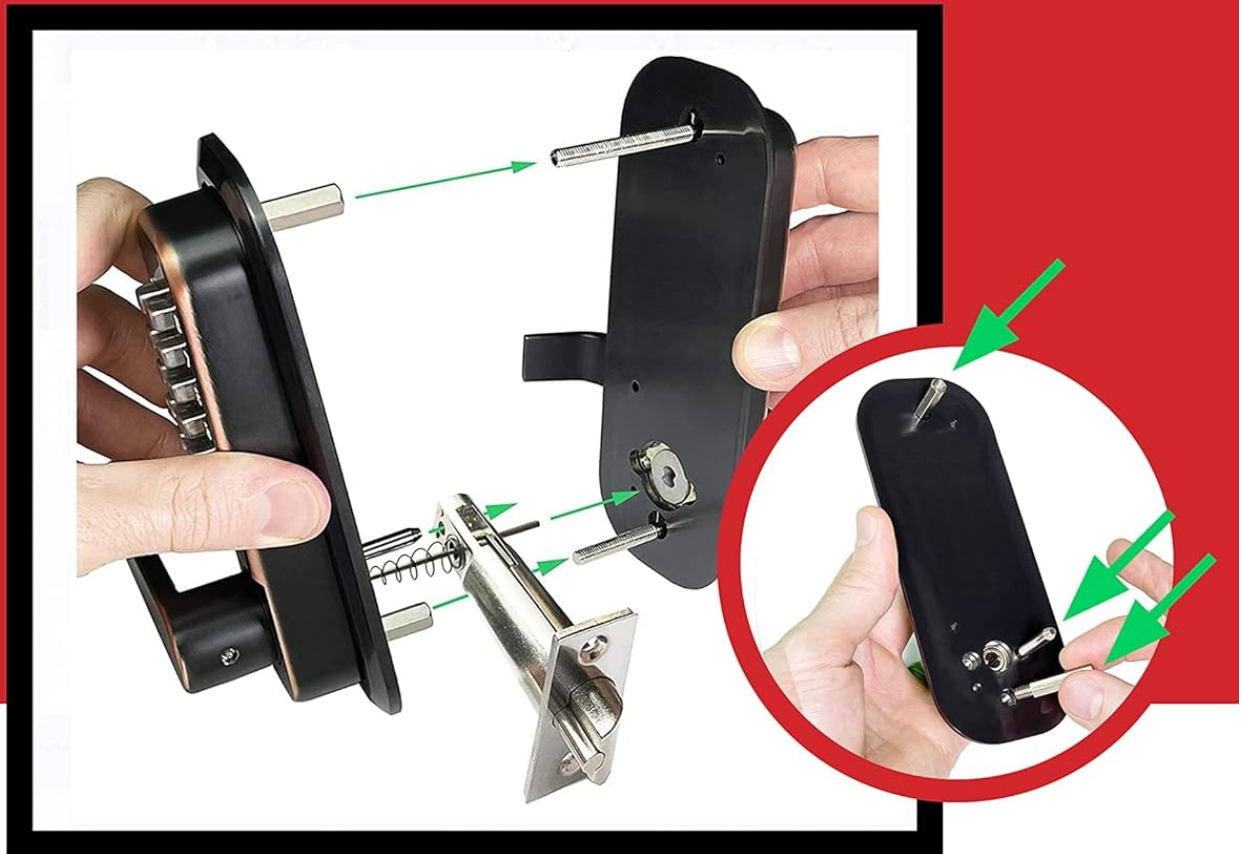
Correct installation of posts, spindle, and spring on the primary keypad.
